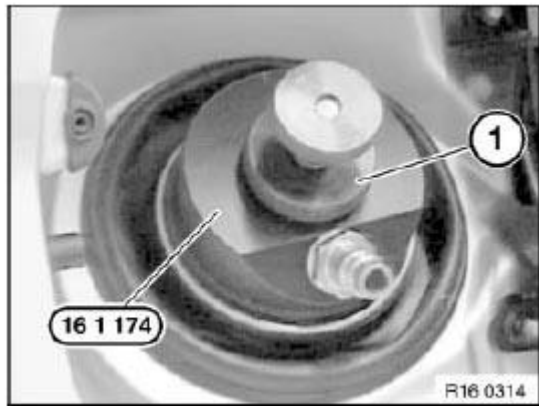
Identifying Adjusting Wheel With Special Tool 16 1 174
